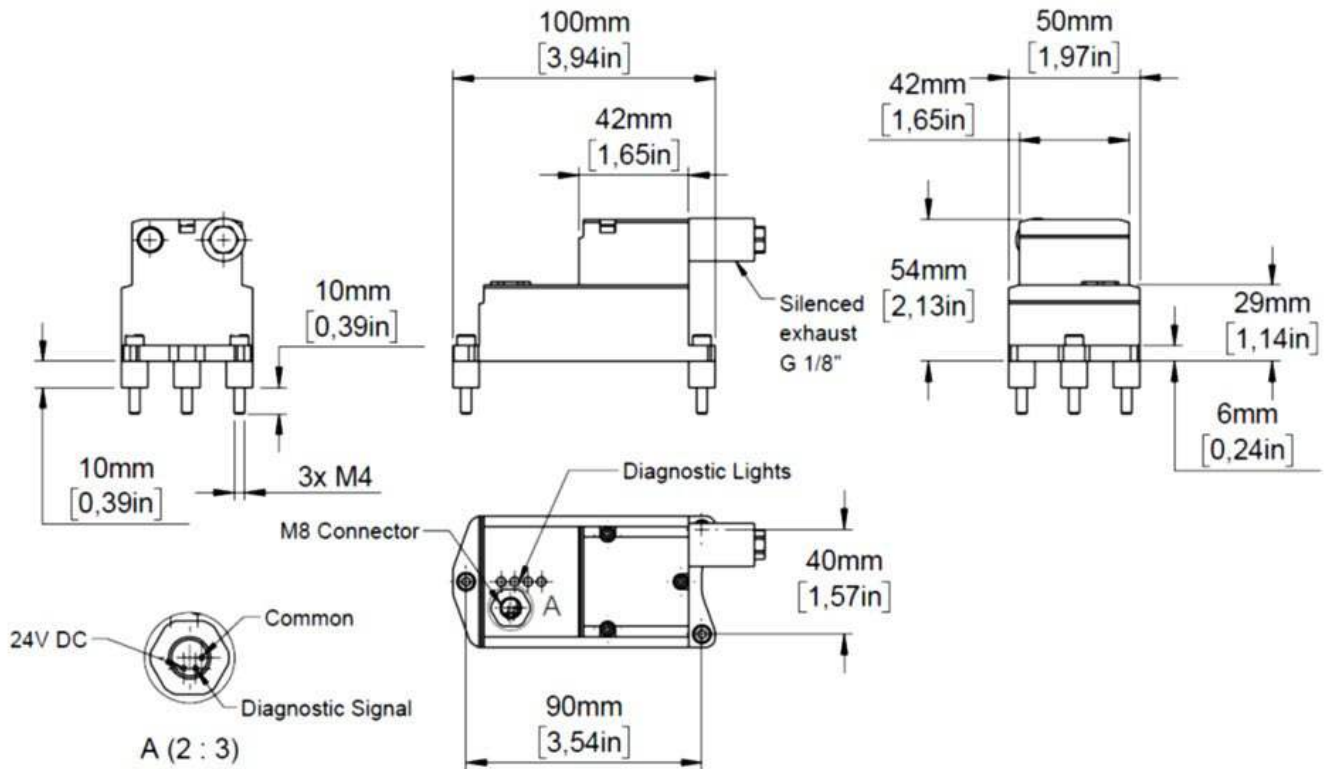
Dimensional Drawing: Pneumatic Power Generator
